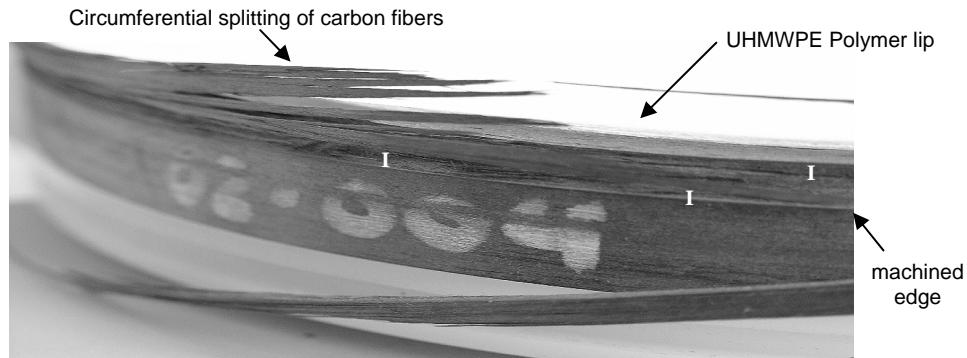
Side-view on fracture of CFR-E rings after full-scale loading at 150 MPa (I = initiation)
